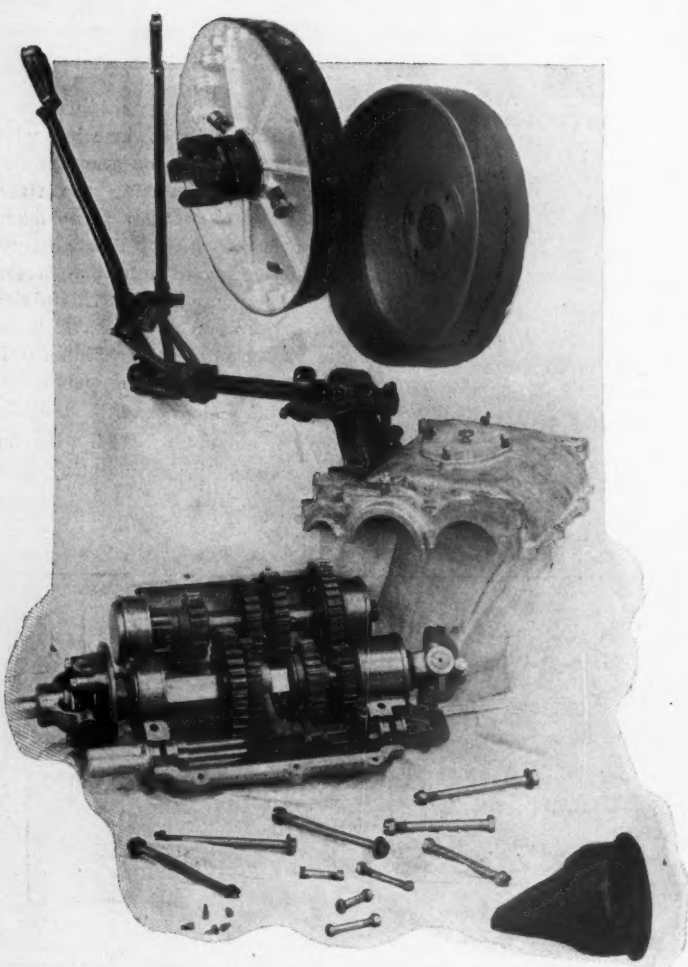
PIERCE FOUR-SPEED SELECTIVE GEARSET
